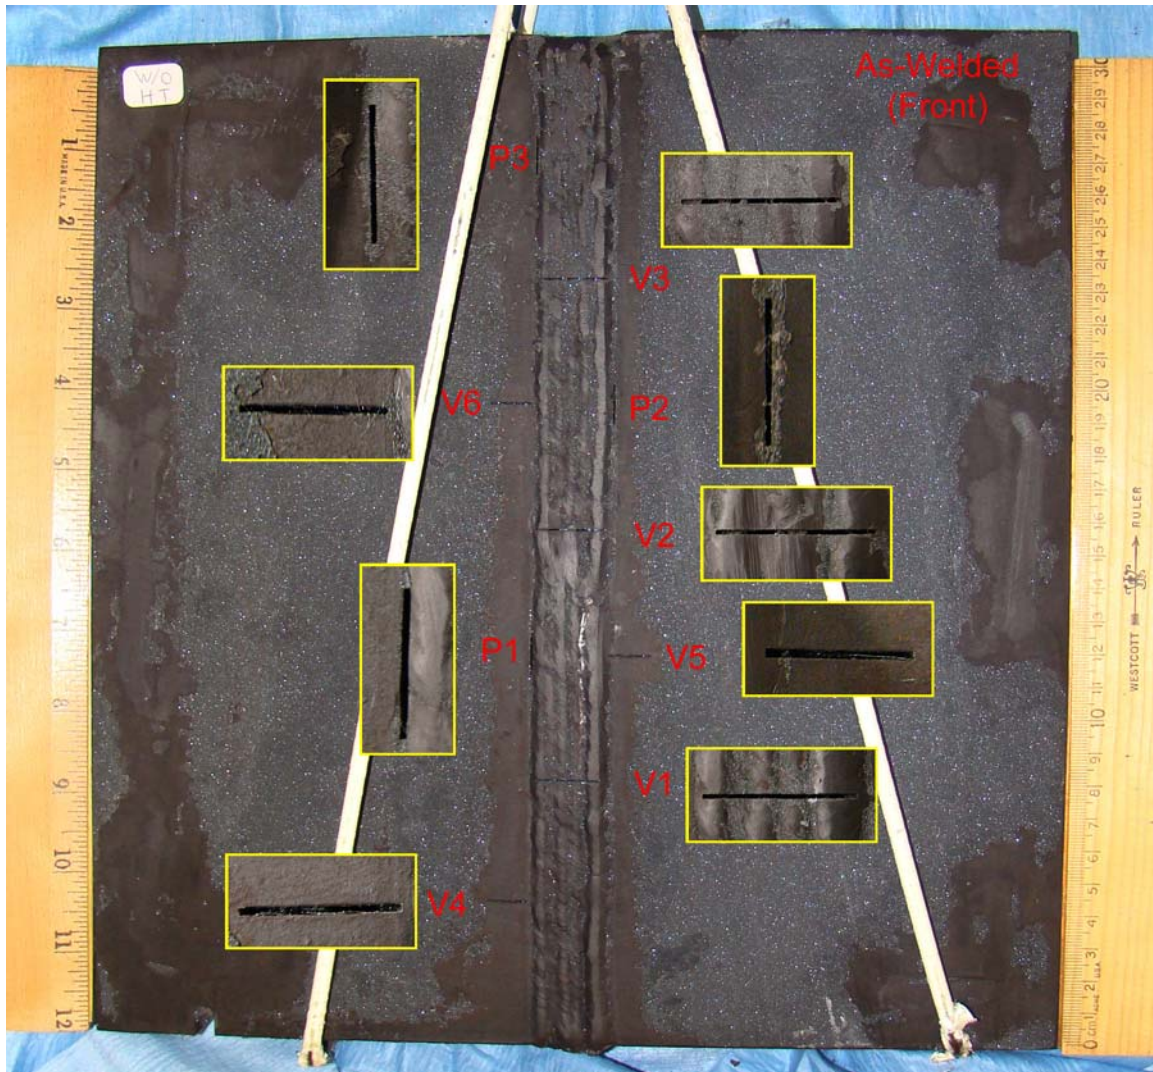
As-welded plate after exposure to test solution for 12 weeks (Front side, insets show close-up of the machined cracks).
